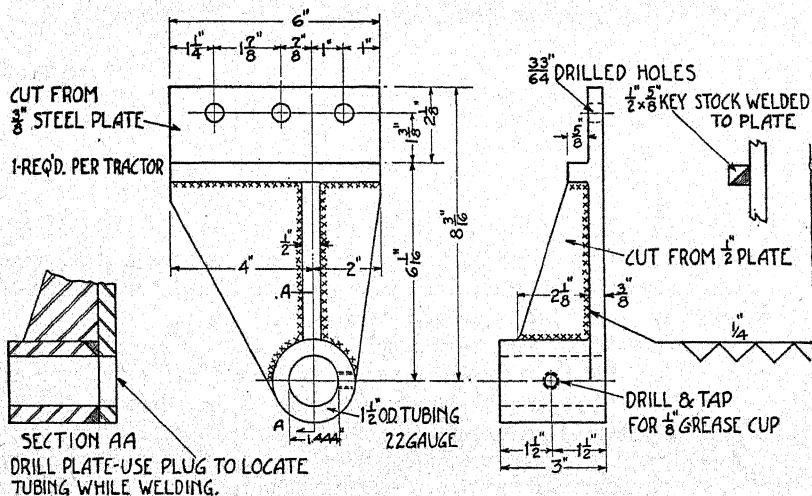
Steering drum shaft hanger, arc welded at \$4.78 saving.
